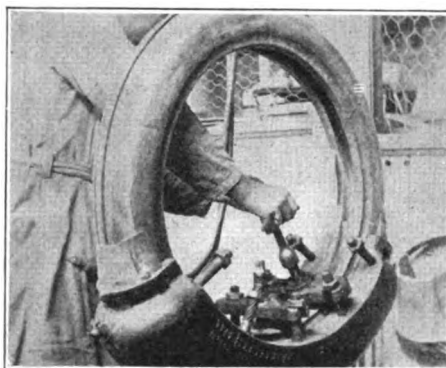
Tightening Up Clamps on One-Third Circle Retread Mold.
